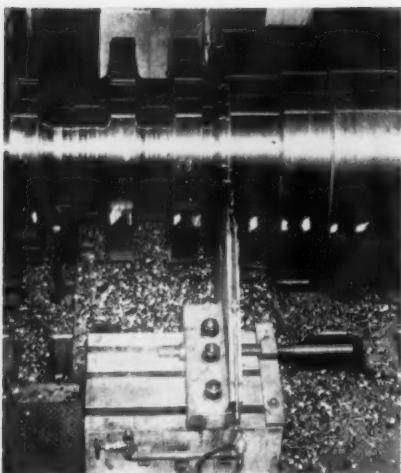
The single-head toolholder on rear of lathe overlaps dual-head front toolholder to allow for cutting 2-inch wide groove.
